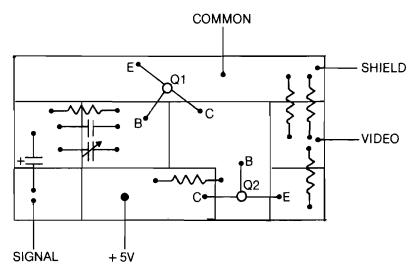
Parts layout for the amplifier board. Each part is soldered into place in the approximate location sketched.
